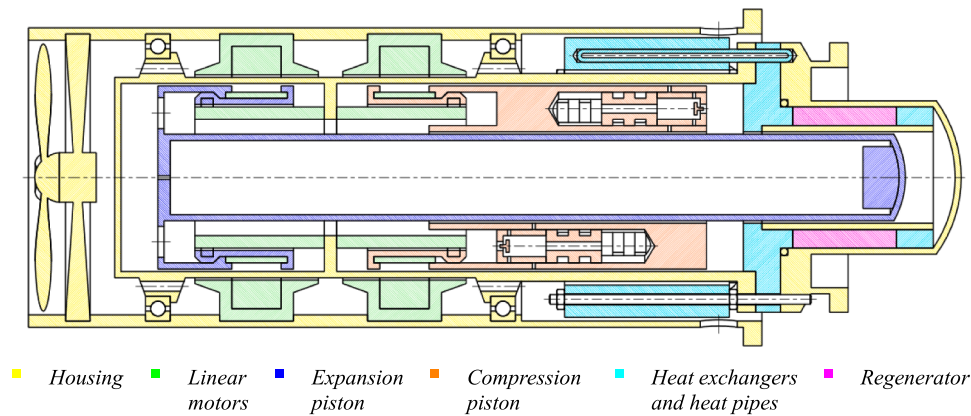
Design option for the rotor-mounted cryocooler with linear motors for compression and expansion piston.
